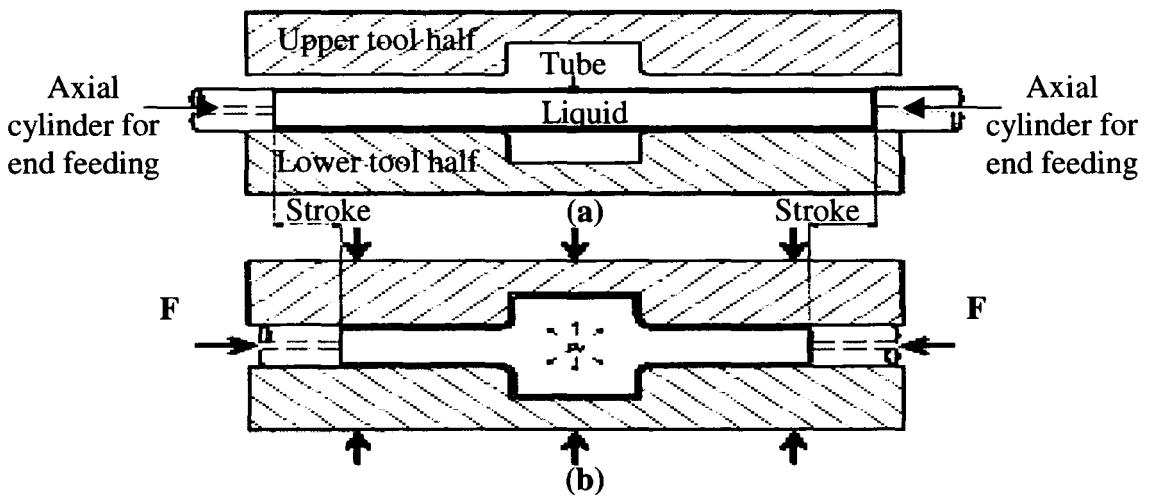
A schematic of tube hydroforming process; (a) original tube placed between two die halves and (b) final tube shape after forming (and before unloading) [Asnafi and Skogsgardh, 2000].
